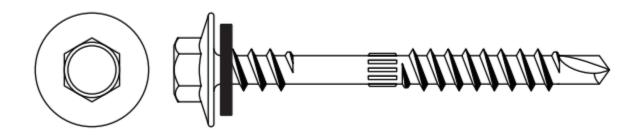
PARTIALLY THREADED FLANGE HEAD DRILLING SCREW WITH CAPTIVE WASHER
